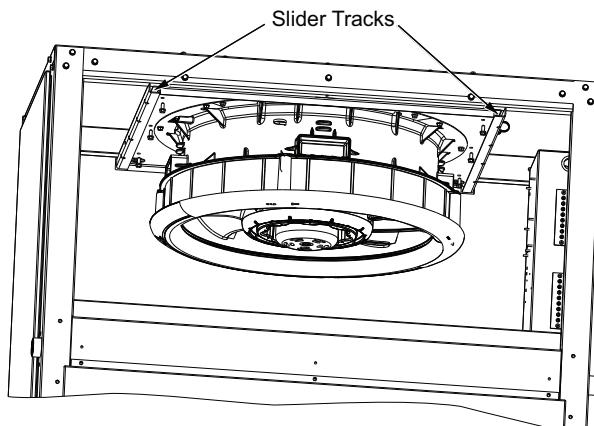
Lower Fan Deck Assembly to Slider Tracks
